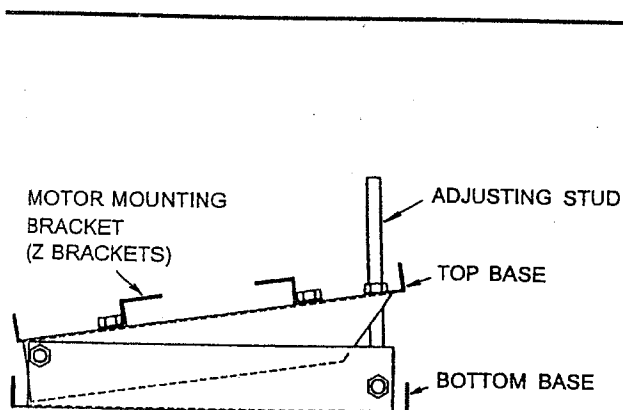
ADJUSTABLE MOTOR MOUNTING BASE
